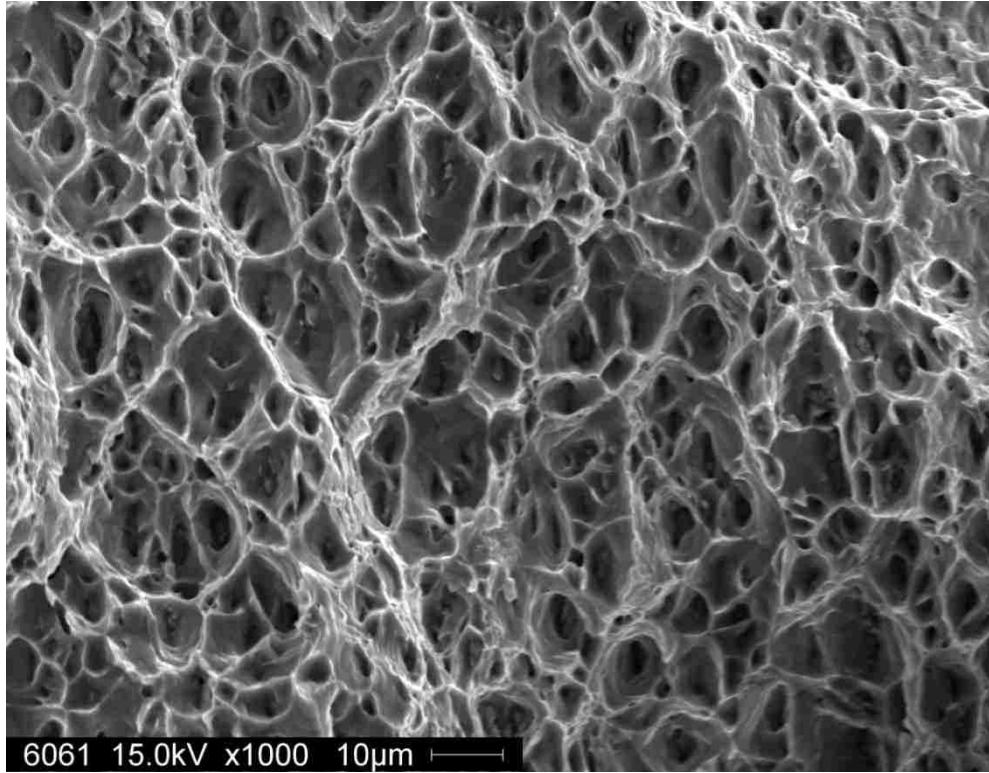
Fractograph of the tensile specimen of welded wrought alloy 6061.
